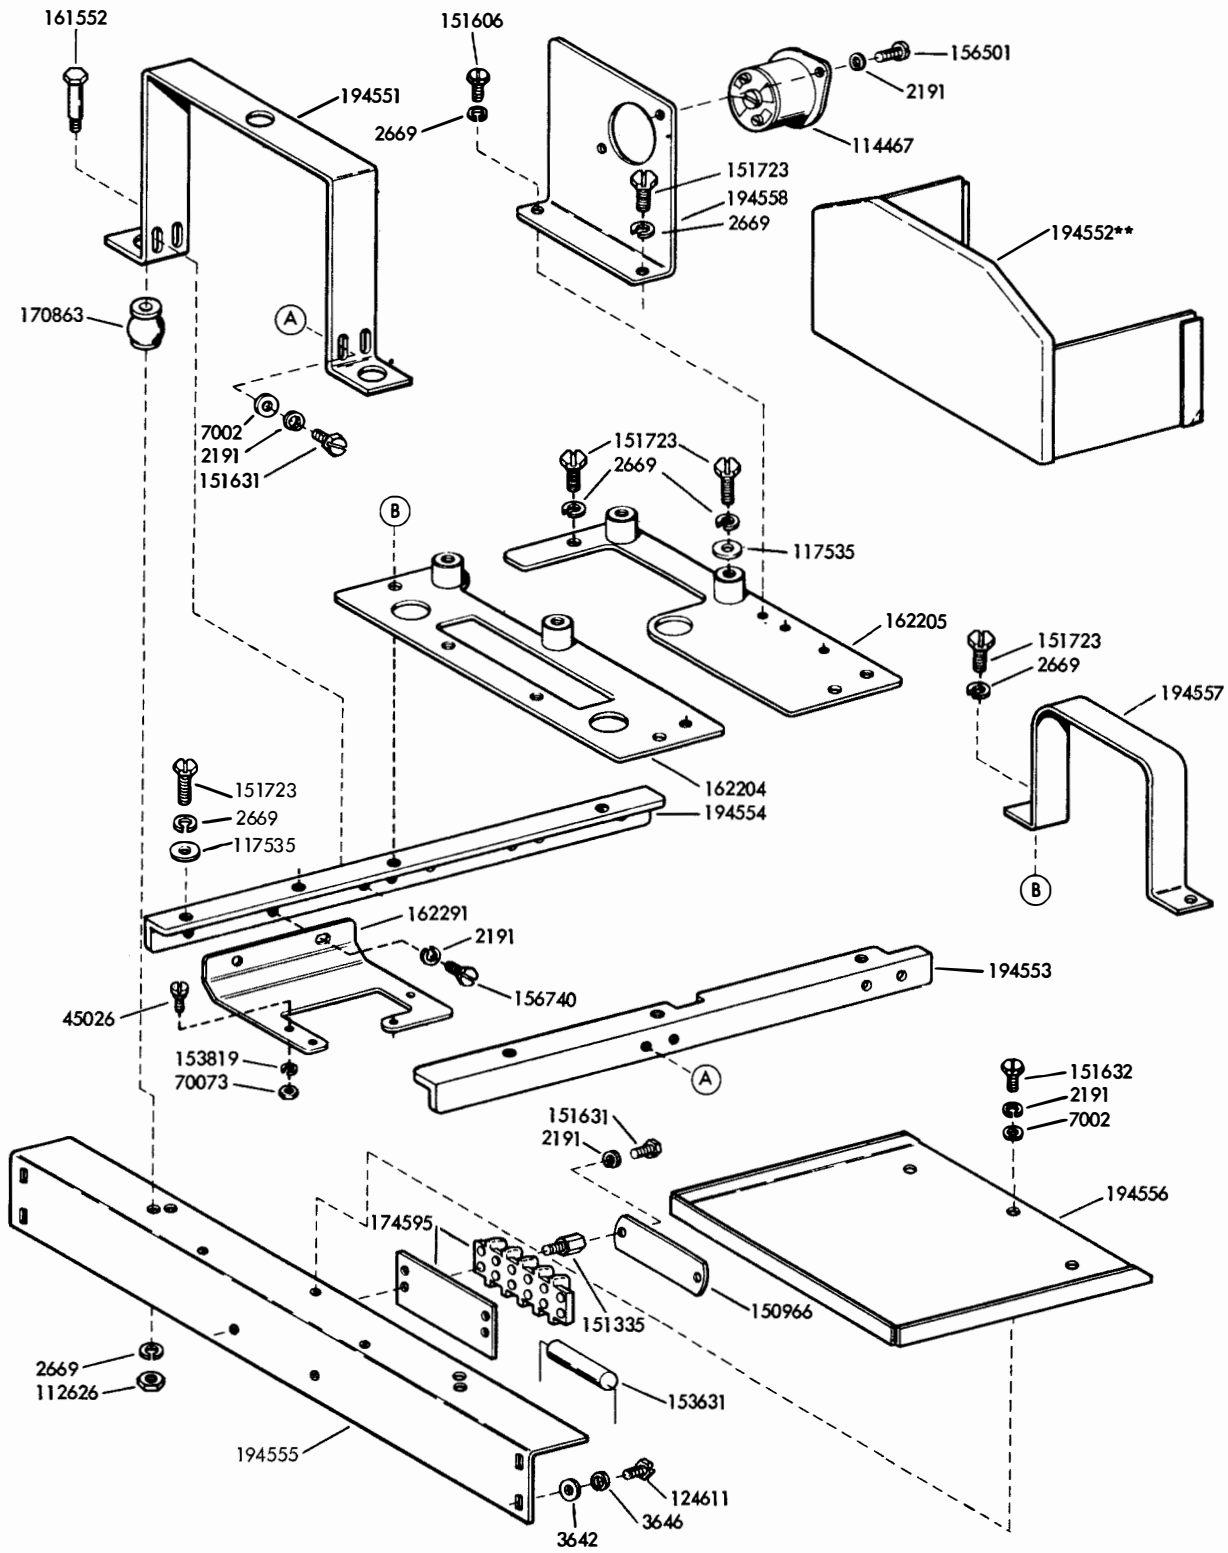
TRANSMITTER DRIVE SHAFT MECHANISM
